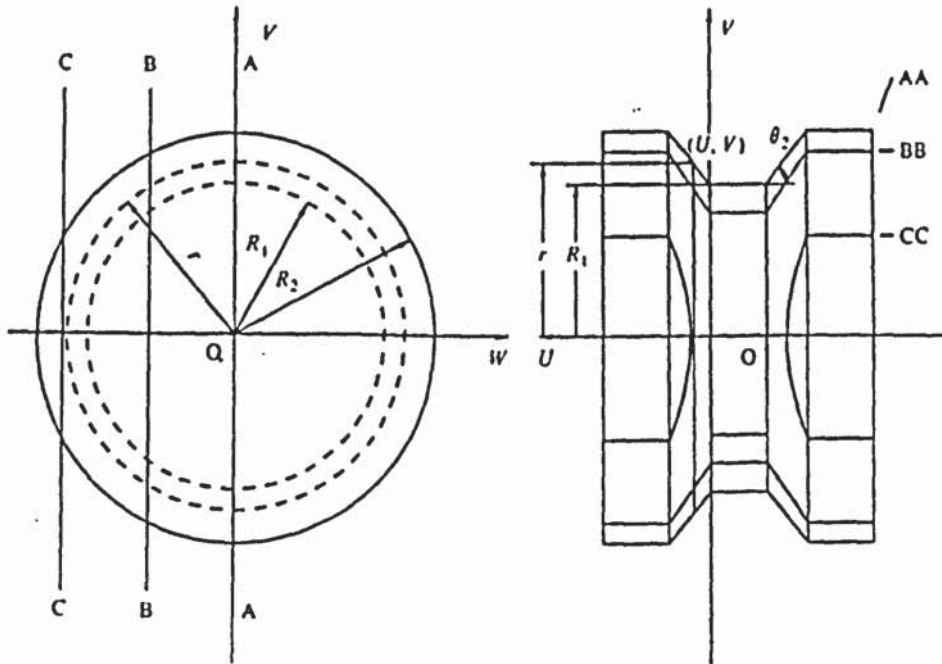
Bottom roll for forming a channel section [Panton3].
